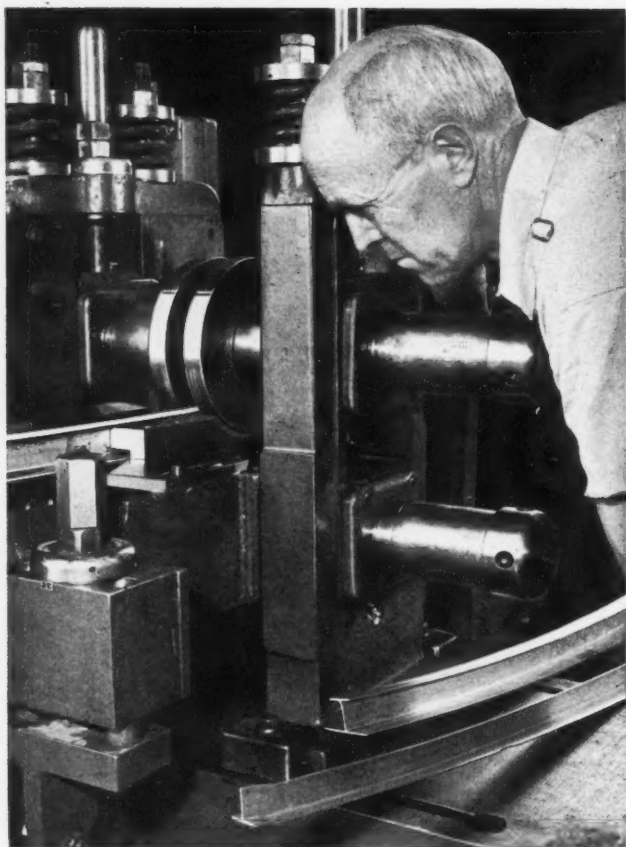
Close-up View of Cam Type Bending Machine, Showing Upper and Lower Bending Shoes through which the Work-piece Passes. Two Types of Pieces are Seen in Foreground
